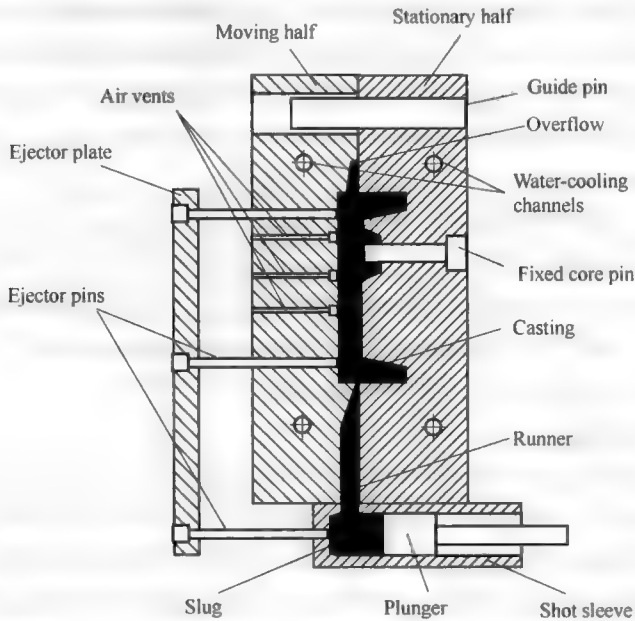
Cross section of a die casting die used for cold chamber die casting
